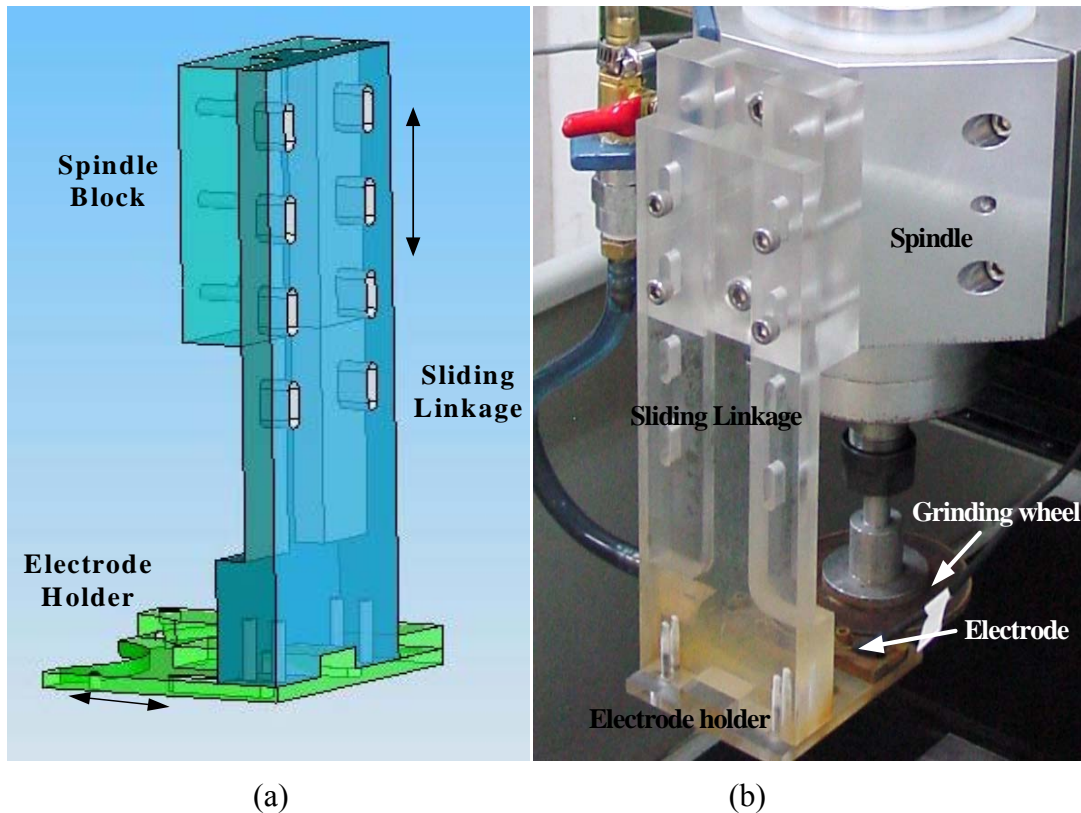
(a) CAD drawing (b) Real image of the Electrode-holder
